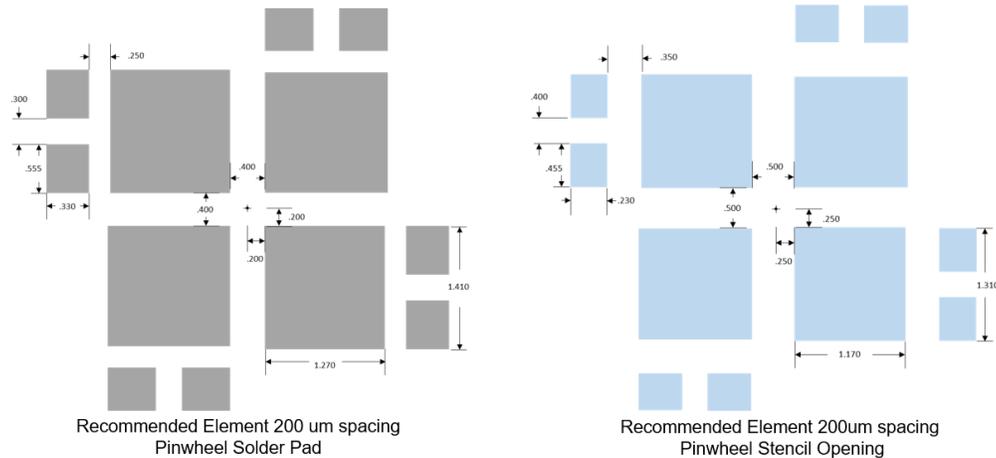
Copper pad layout (left) and stencil dimensions (right) used for a 200- μm spacing in a 2x2 array
